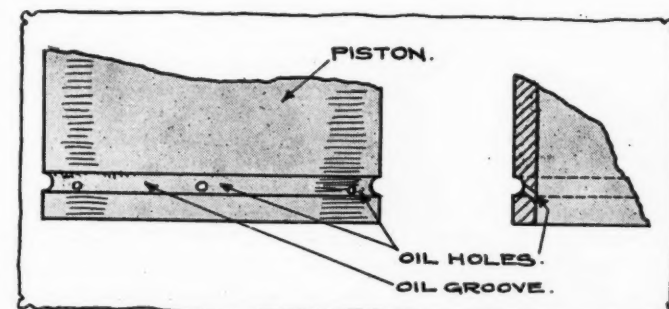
Oil groove with holes cut on a slant to prevent accumulation of oil in combustion chamber
